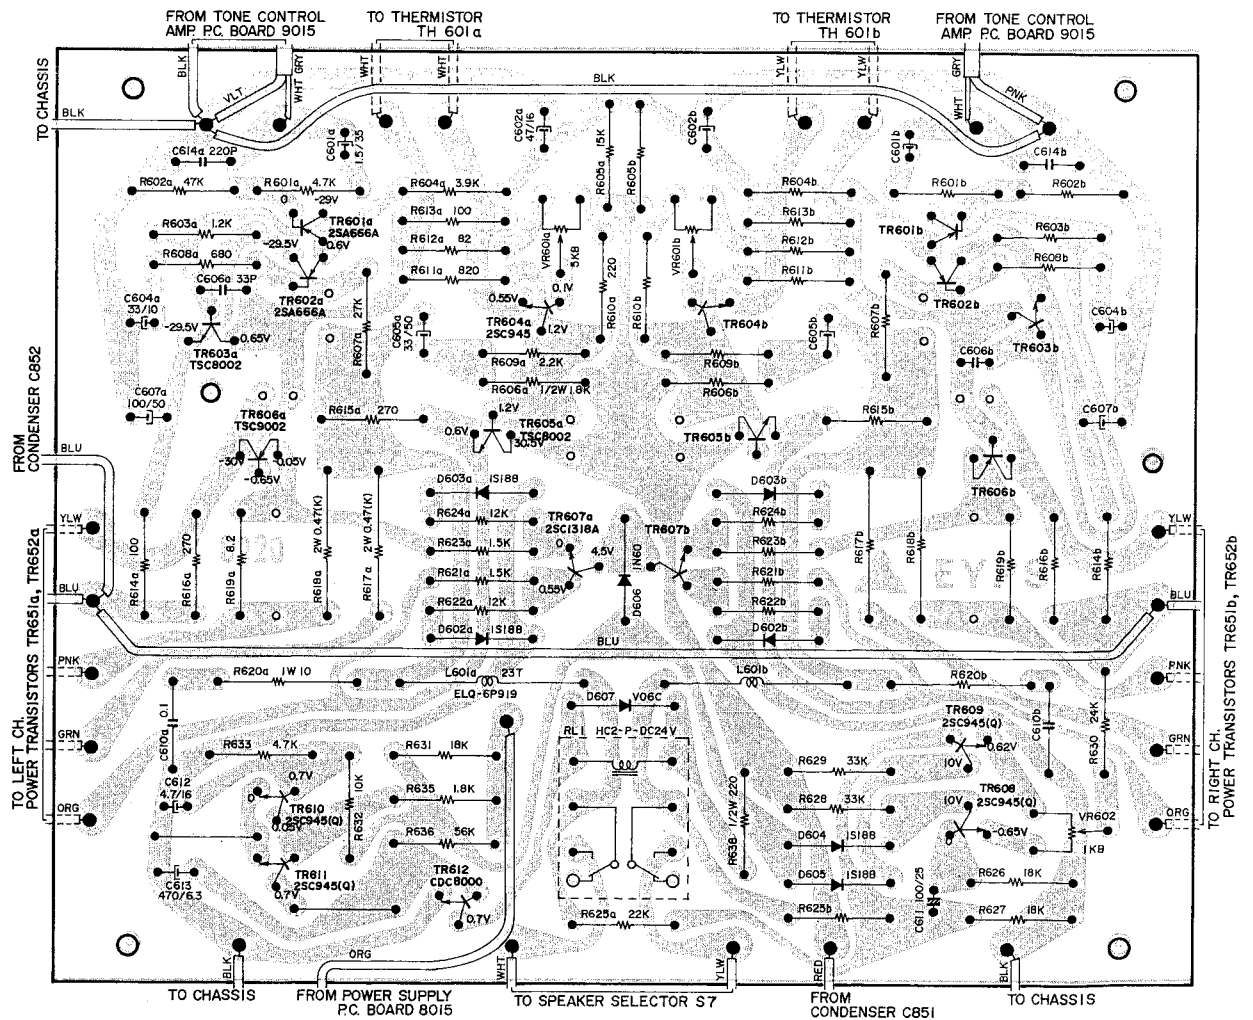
POWER AMP. P.C. BOARD 6020 (Face Side)
